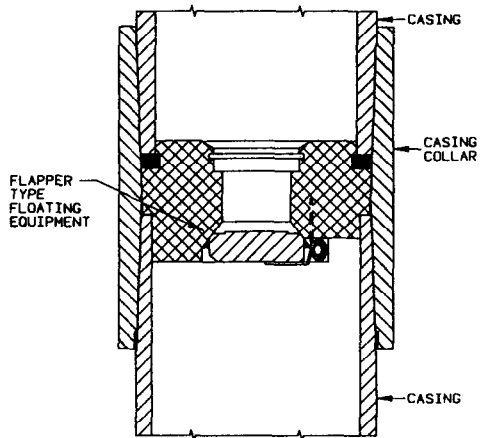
Flapper-type floating equipment installed between pin threads in a casing collar
